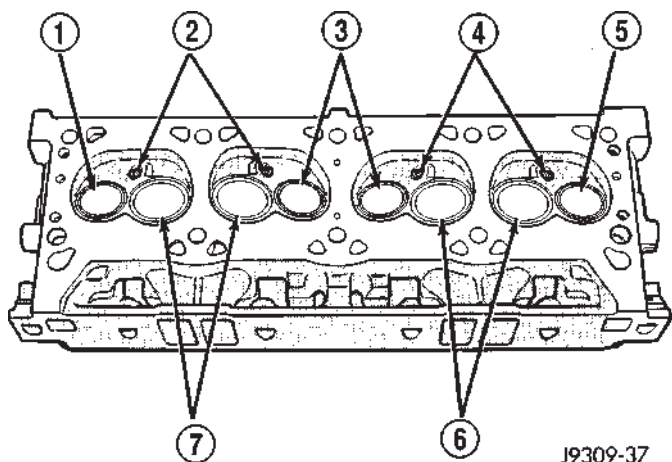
Cylinder Head Assembly—V-8 Gas Engines
